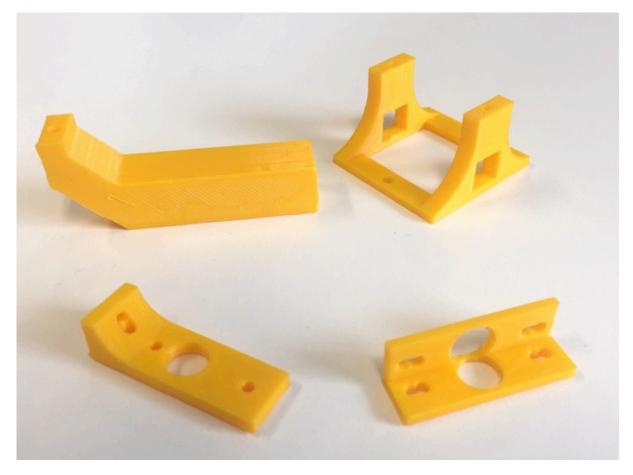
The 3D printed parts for the Emotional Machines gesture prototype
